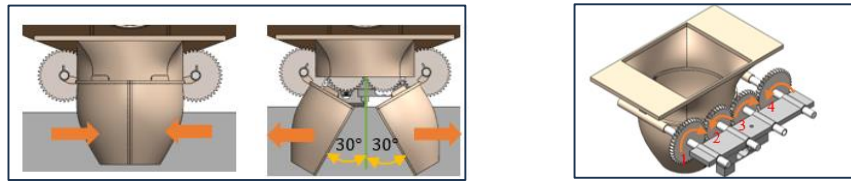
Left: Rotation of Dispense Mechanism, Right: Rotation of Gear
